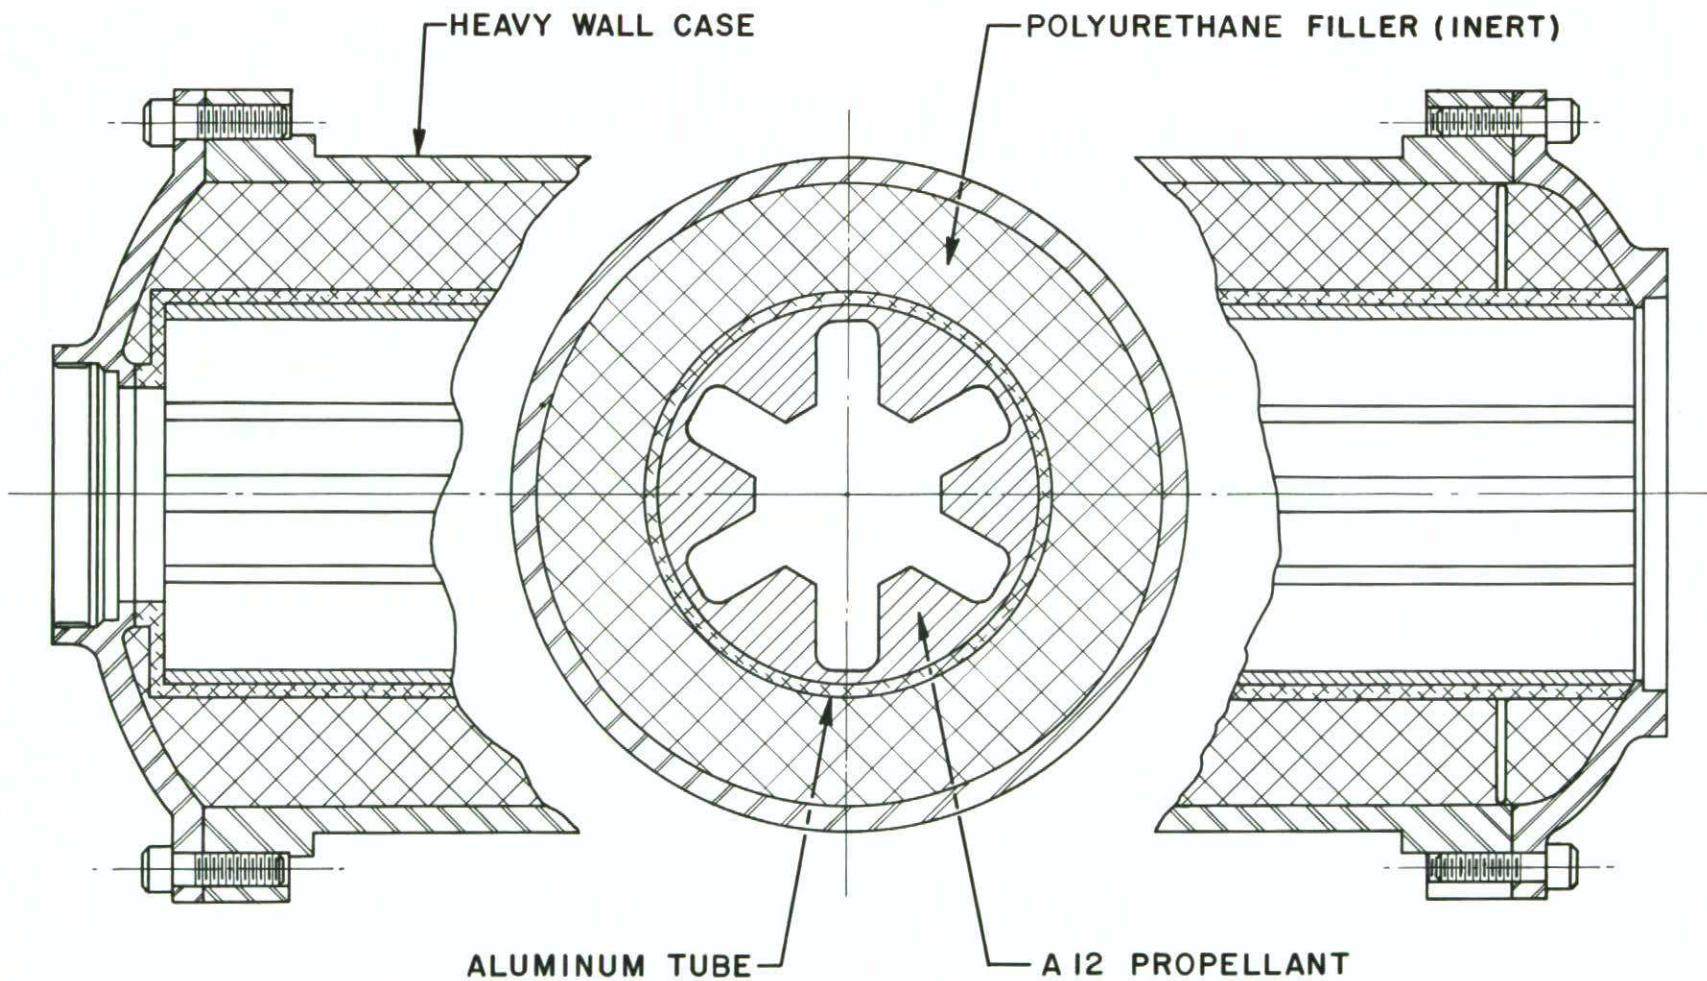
Rocket Motor for Vacuum Igniter Tests
